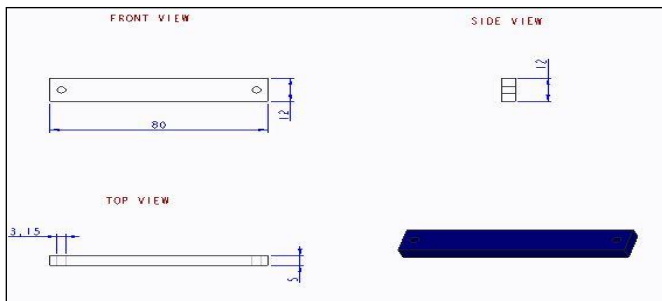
ASTM D638 standard and 3D model of flexural test specimen.
